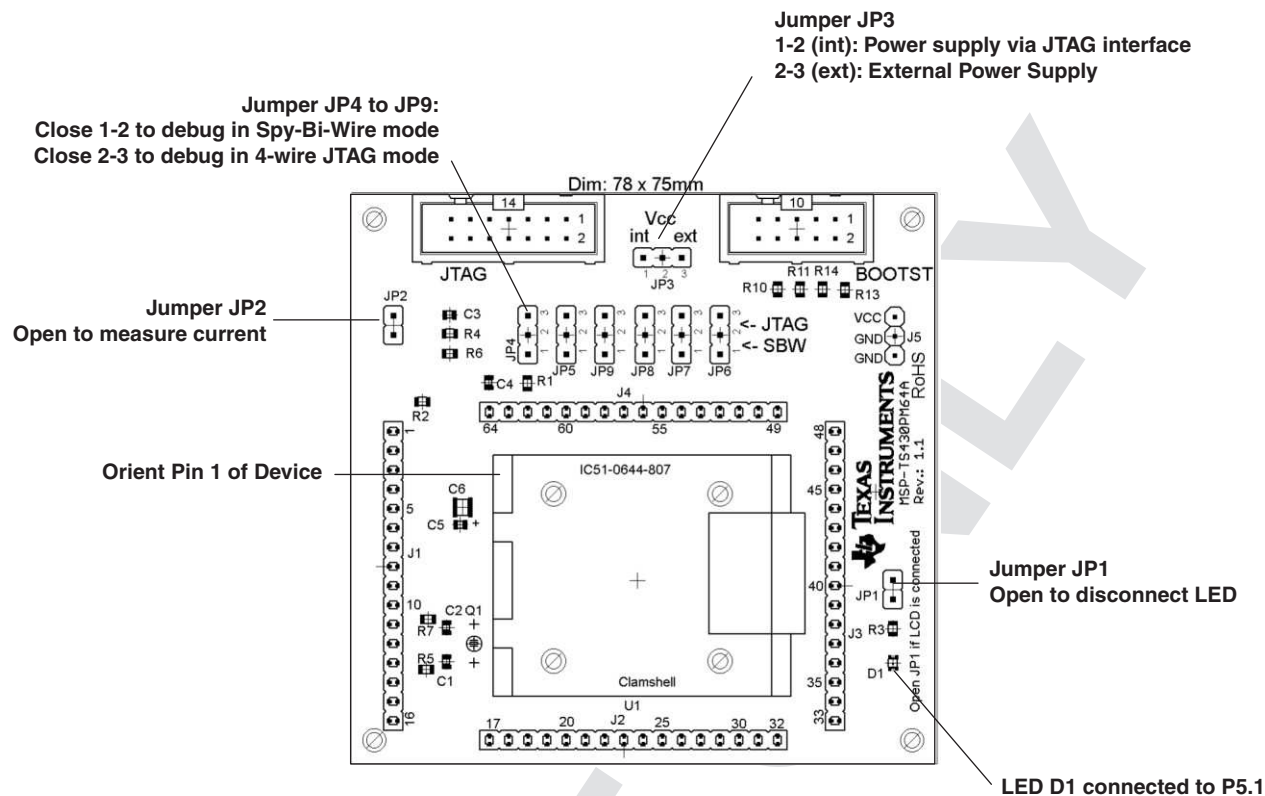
MSP-TS430PM64A Target Socket Module, PCB
